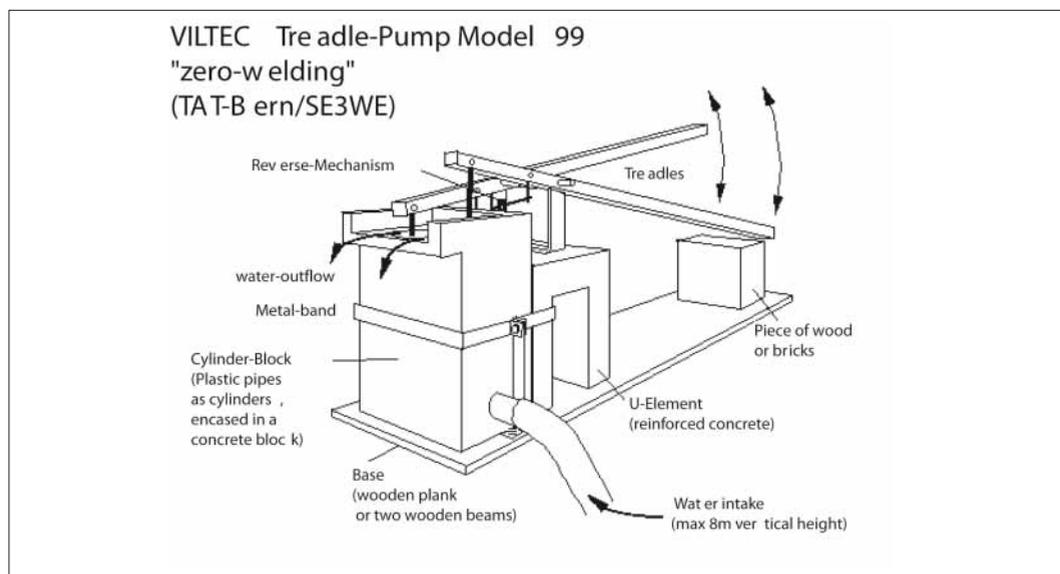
Treadle pump (Viltec treadle-pump model 99 “zero welding”).
